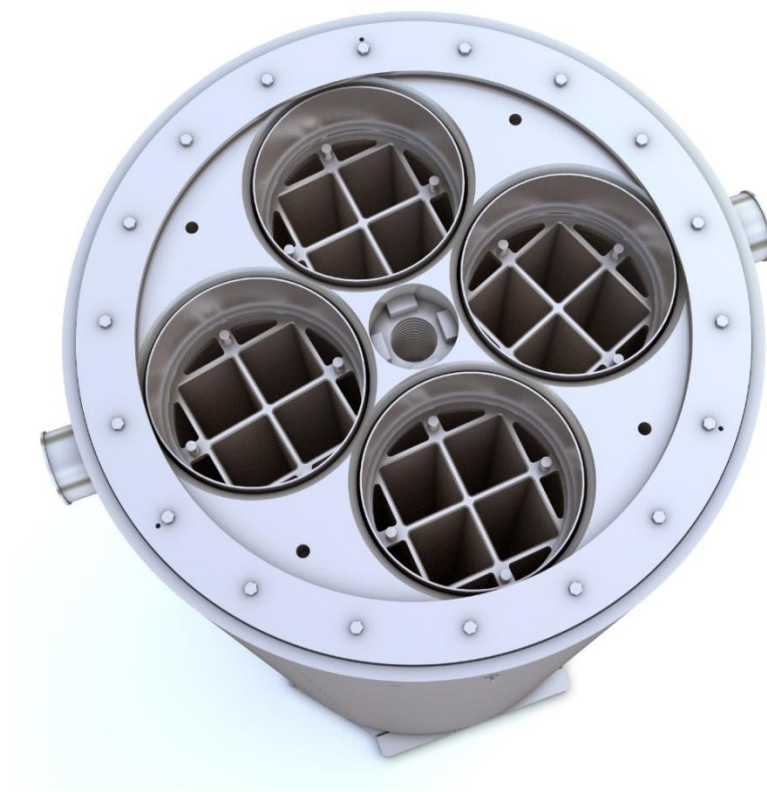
Loaded STAD Carrier in Transfer Cask – Top View
